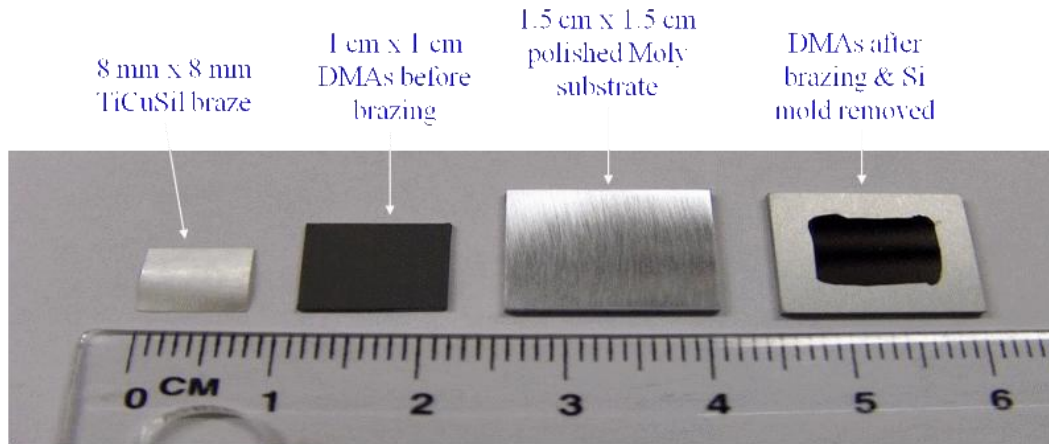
Braze components for arrays produced at Vanderbilt University.
